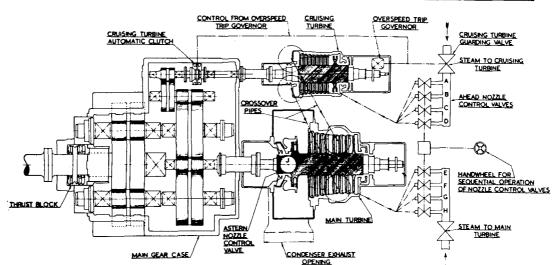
DIAGRAM OF MAIN ENGINES WITH AUTOMATIC CRUISING TURBINE CLUTCH AND DOUBLE REDUCTION GEARING
